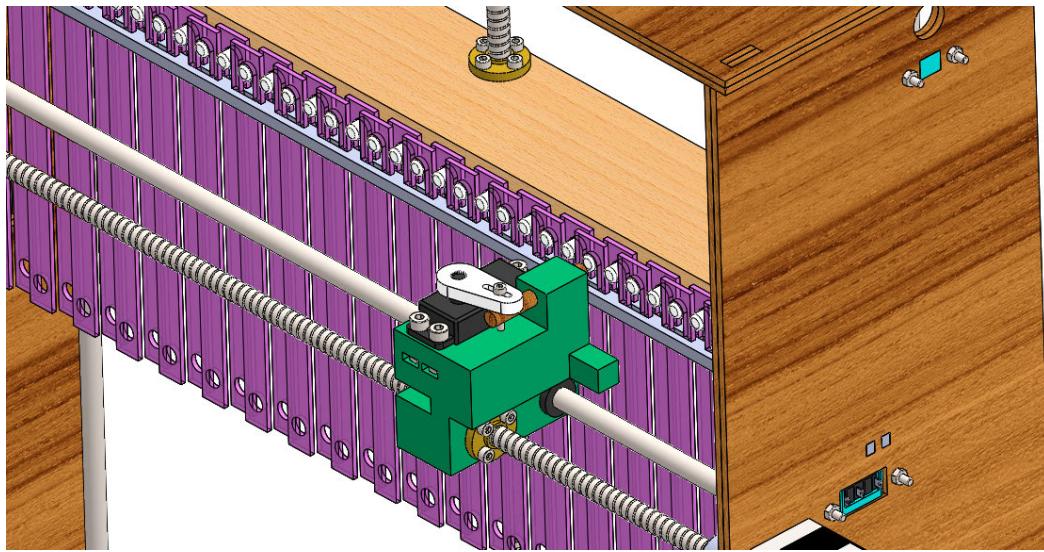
Zoomed in isometric view of heddle automation sub-assembly
